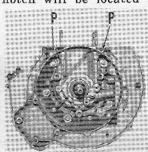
A-Drive tapered pins (P) out before separating crankcase halves.
